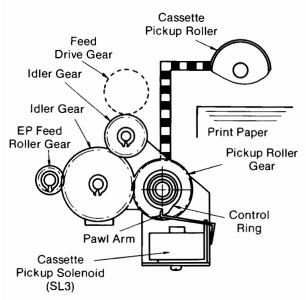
Cassette Pickup Assembly HP 2686A (Disengaged)
